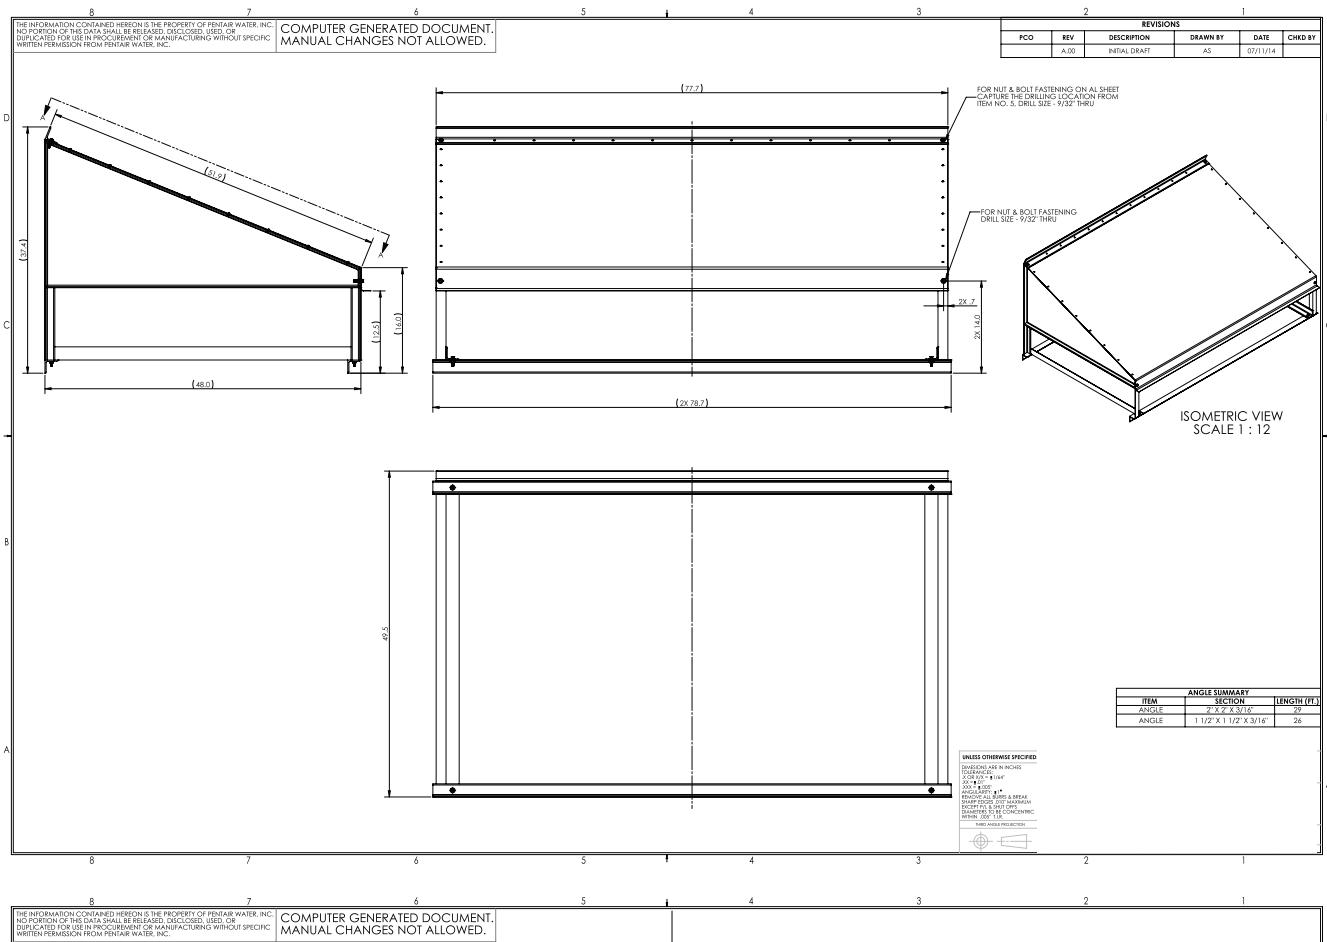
Drawing details for WhiteWater Unit (WWU) frame and hood
